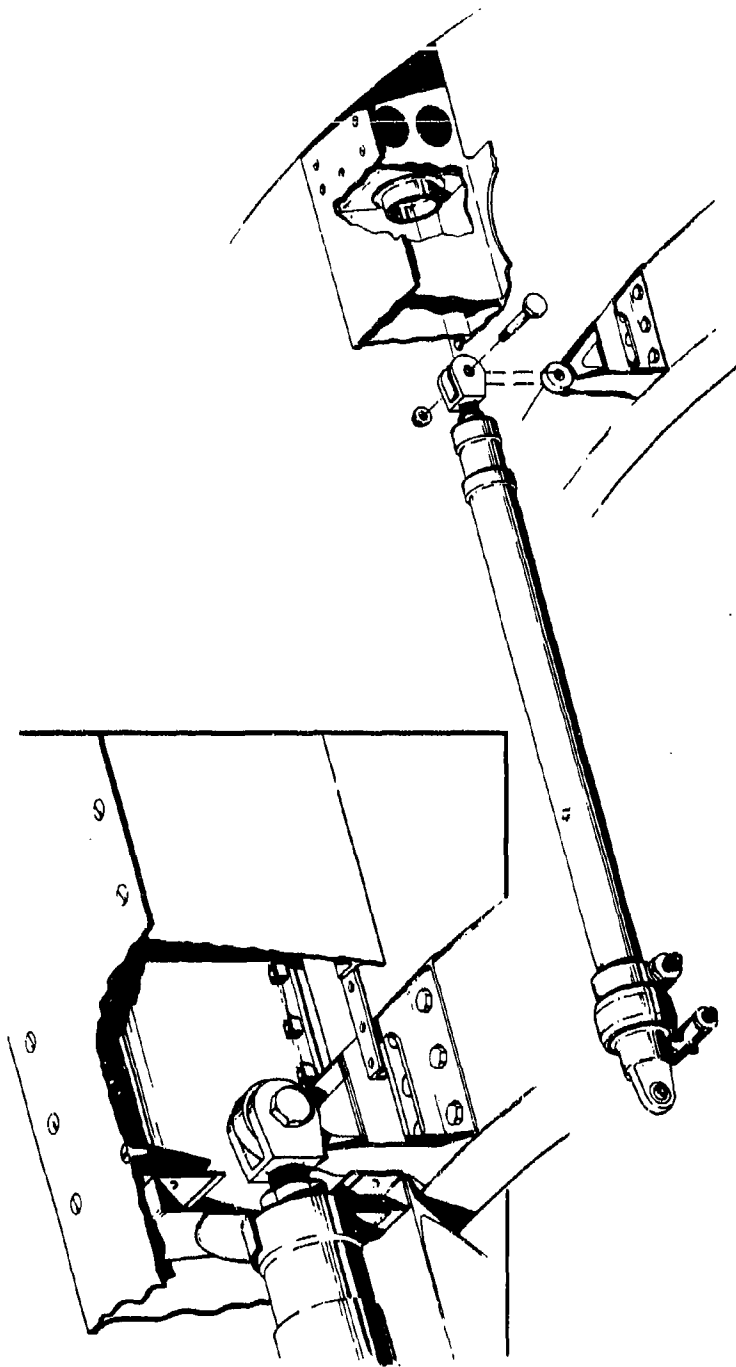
ACTUATOR MOUNT TO HINGE AND RING
